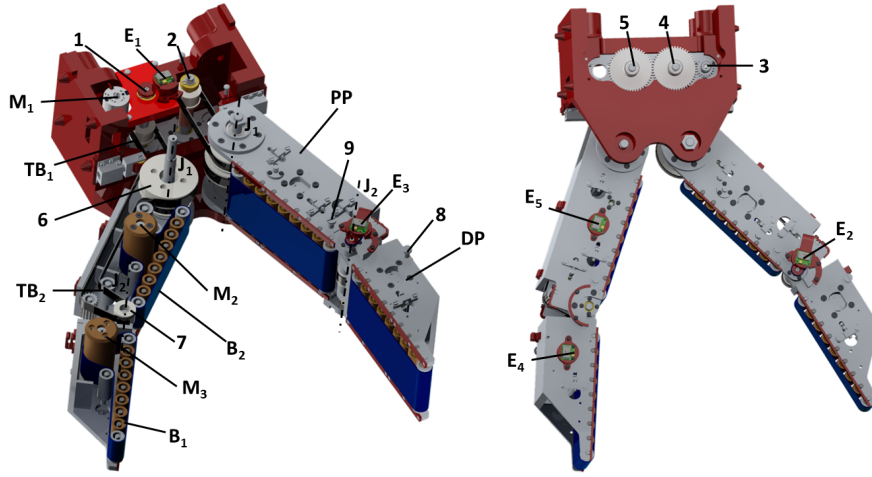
CAD design of the final version of the Velvet Fingers.
